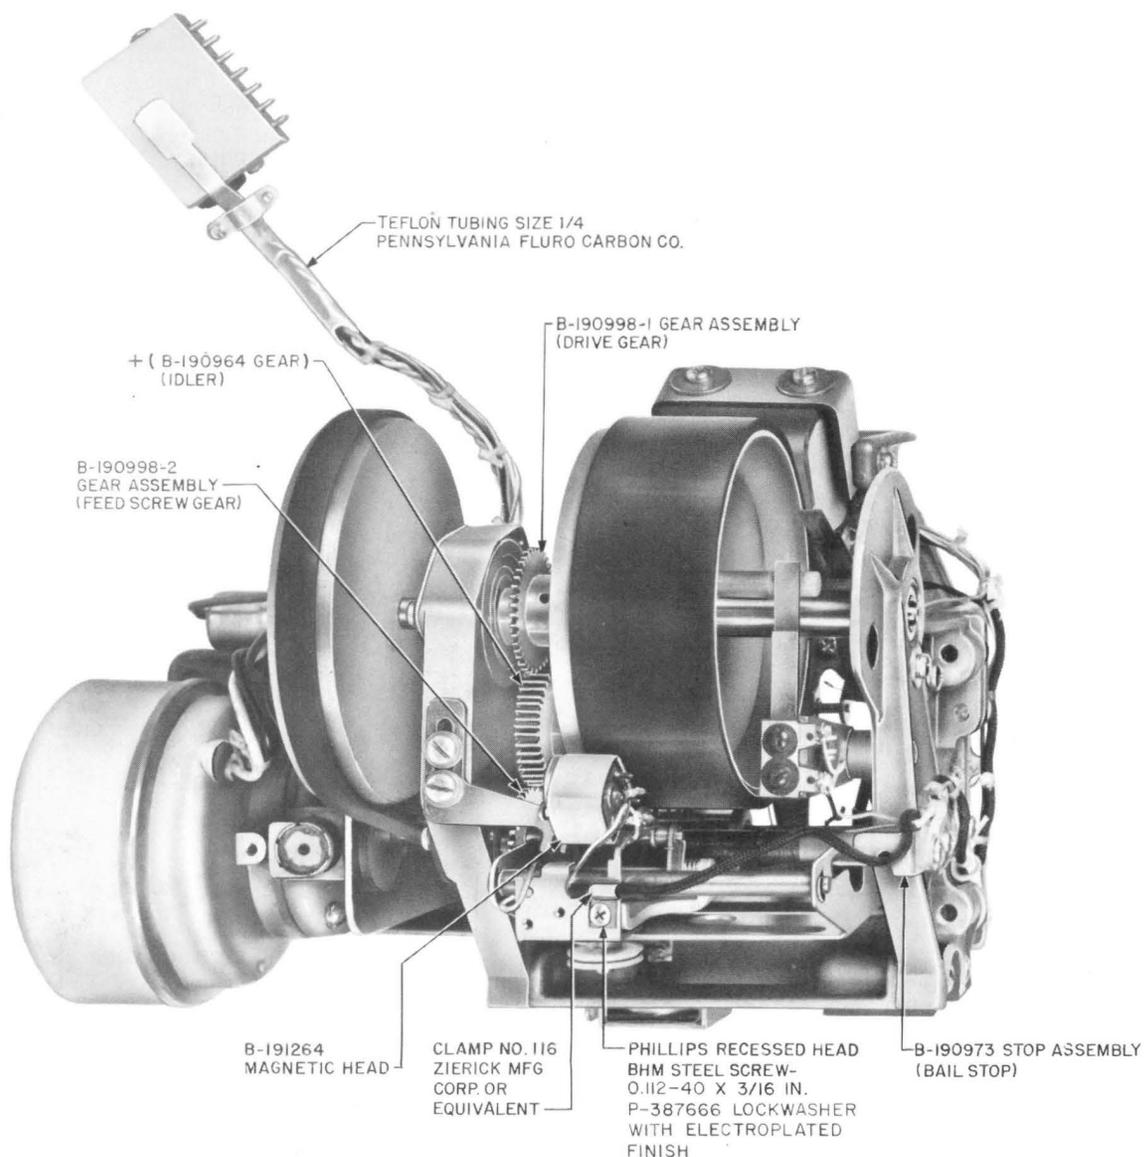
KS-16765 L3 Recorder Equipped With KS-15914 L2 Motor—Rear View
